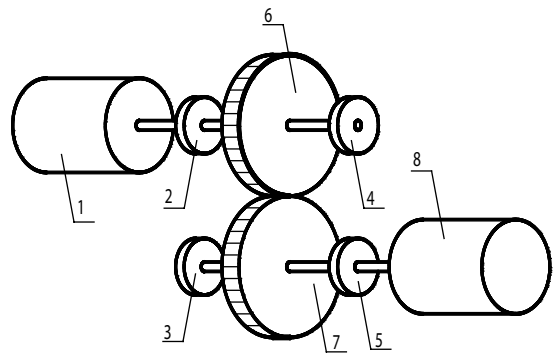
A schematic view of transmission: 1 – electric motor; 2, 3, 4, 5 – bearings; 6, 7 – pinion and gear; 8 – load
